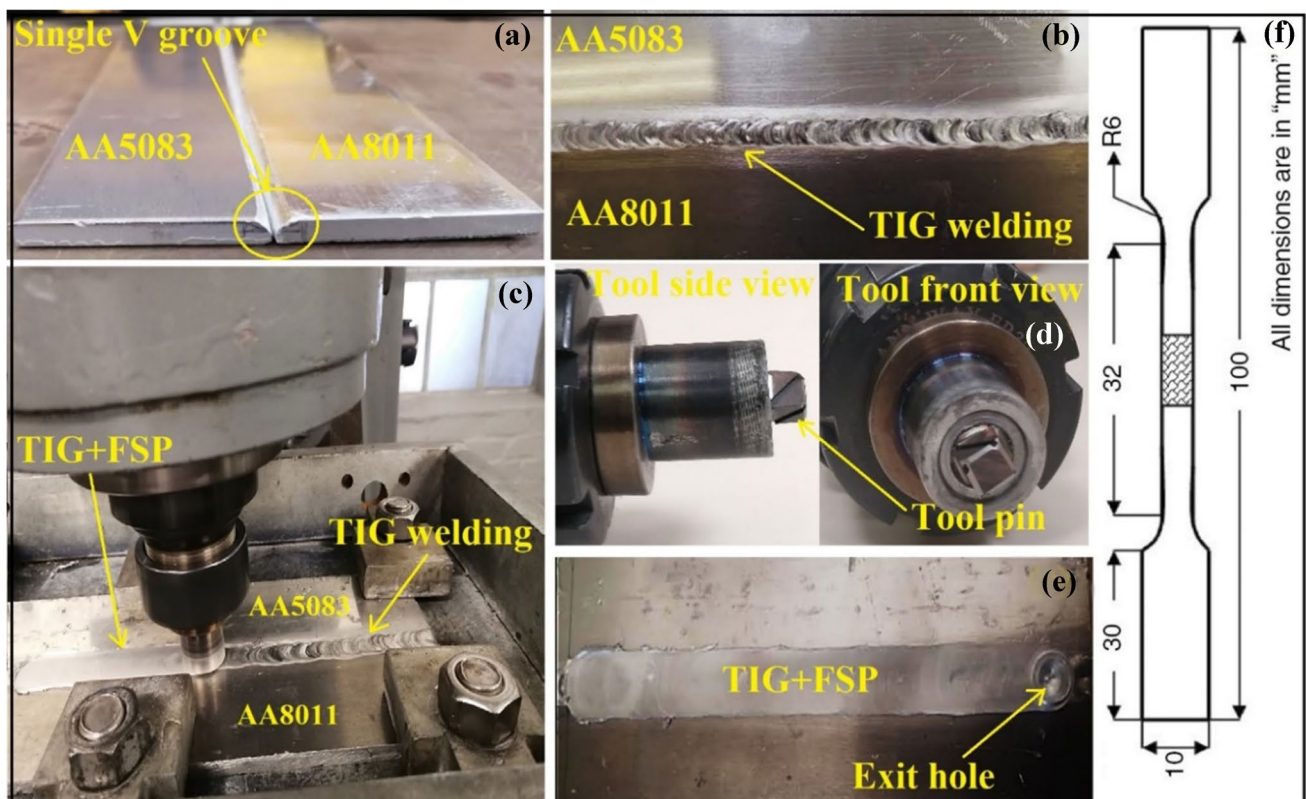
Experimental process of TIG and TIG + FSP welded joints, (a) V groove of 60° for TIG welding, (b) TIG weldment with filler ER4043, (c) TIG + FSP process, (d) tool used during FSP, (e) TIG + FSP welded joint, (f) tensile sub test specimen
